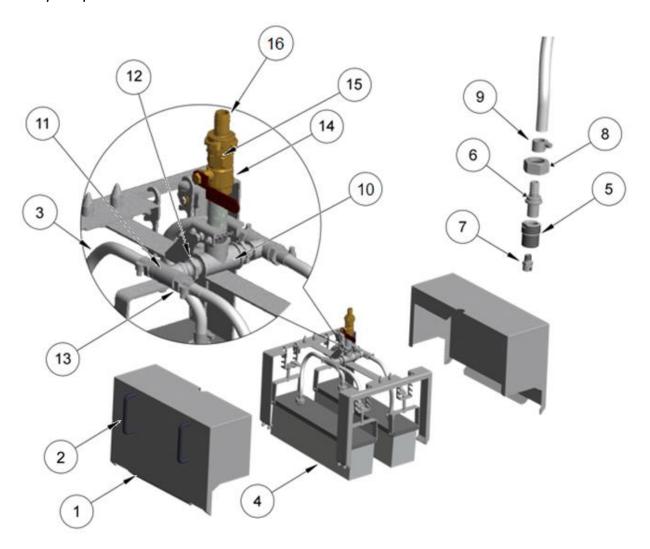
Picture with key - Cleaning sorting conveyor BRM [Circular brushes]
